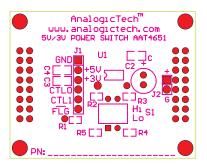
Evaluation board top side silk screen layout / assembly drawing
